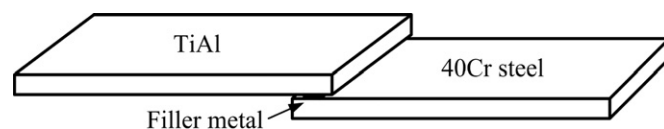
The schematic diagram of assembling the workpieces and filler material.
